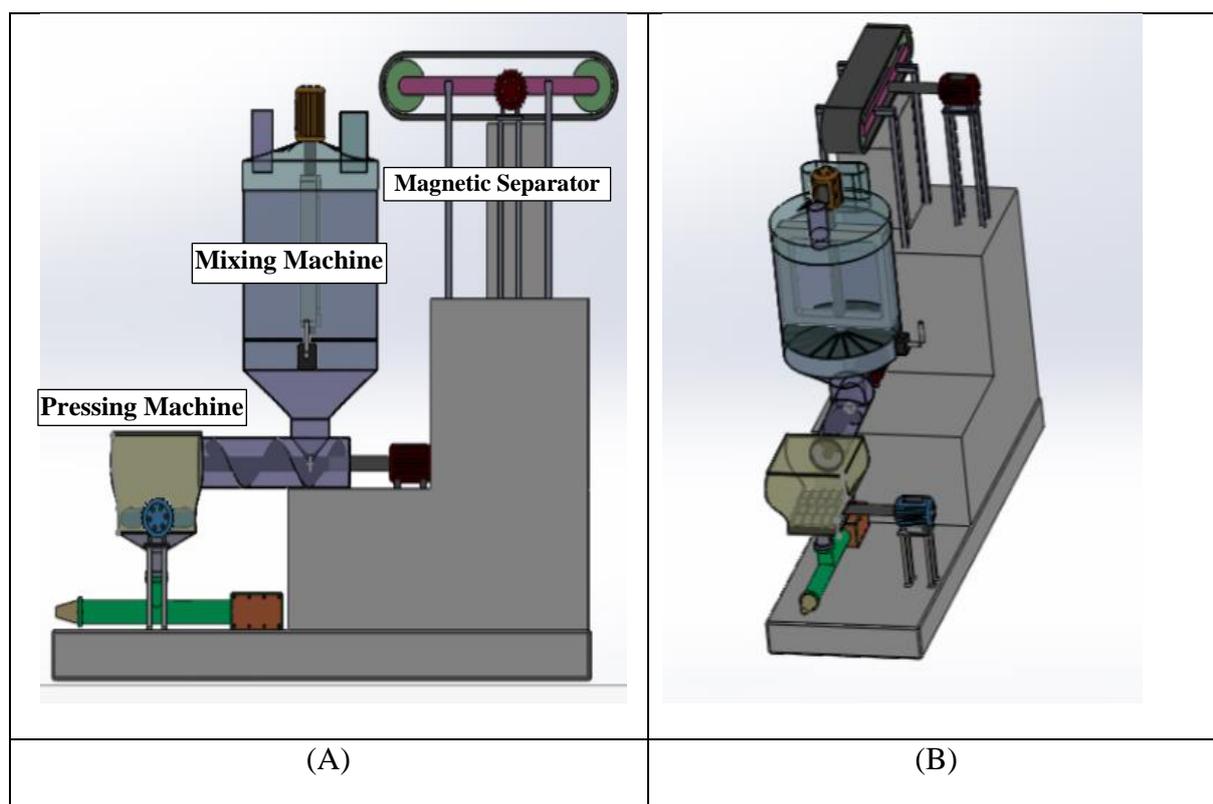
A and B are industrial briquette carbon fuel pressing machines.
